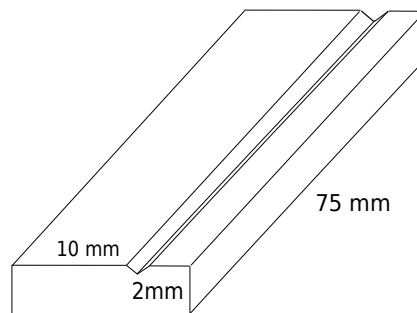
Axonometric projection of one of the two mirrored parts that composed the fiber holder. The two parts leave a rotated square-shaped hole
